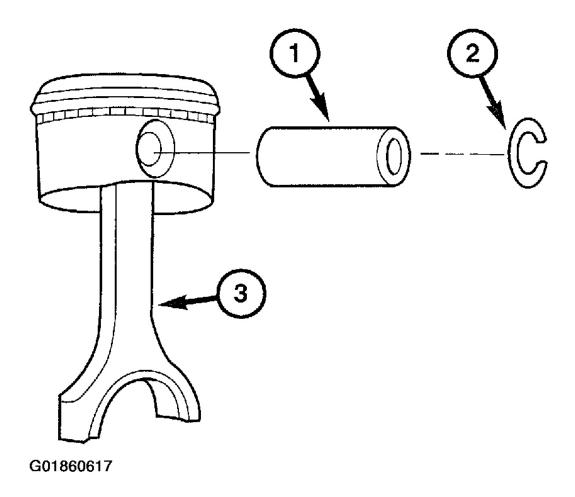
Installing Connecting Rod, Piston Pin & Snap Rings Courtesy of DAIMLERCHRYSLER CORP.
